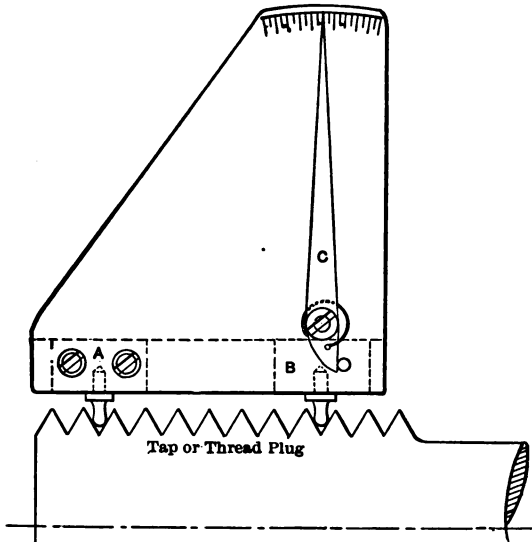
Simple Form of Comparator for Lead of Screw Threads
